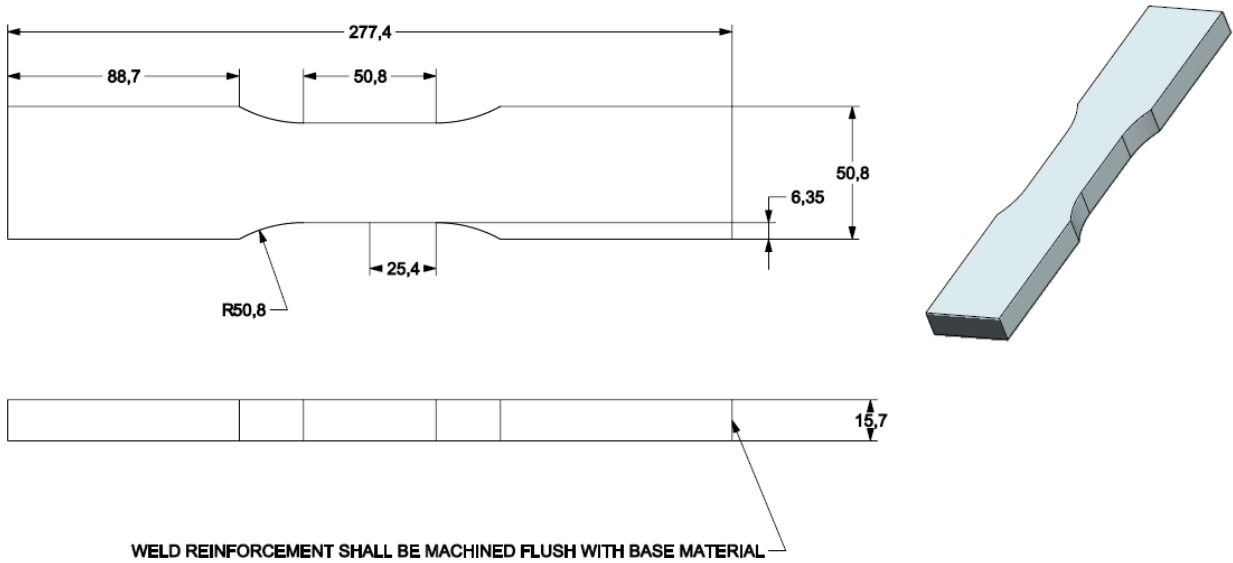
Transverse rectangular cross weld tensile specimen according to AAR specification [3].
